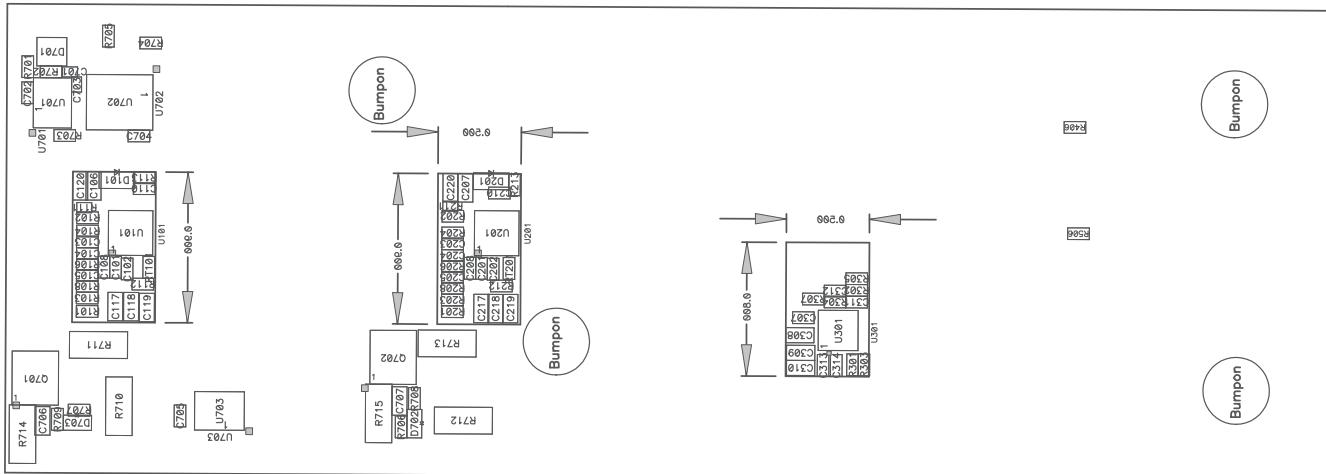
TPS59610EVM-675 Bottom Assembly Drawing, Bottom View
